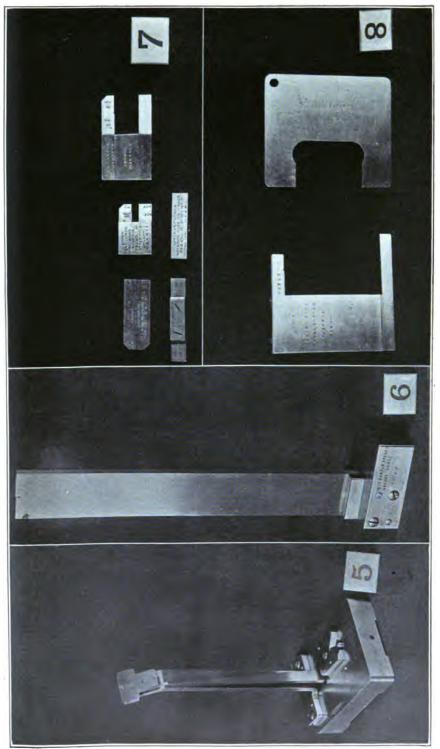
Indicator, height, and snap gauges. 5. Indicator gauge. 6. Test bar for Franch height gauge. 7-8. Snap gauges, built up and solid.
